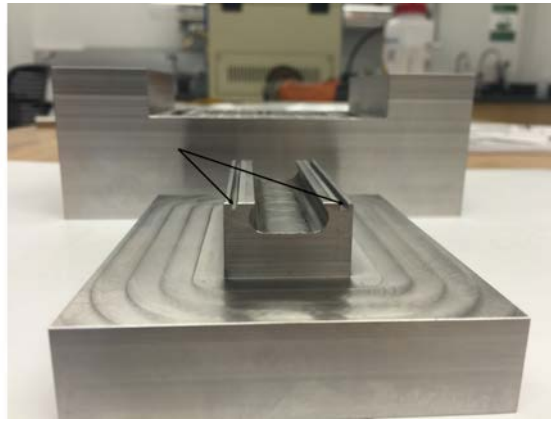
Front view of the test cell lid with arrows pointing out areas for o-rings to be housed to ensure a force holding test coupon to bottom of test cell.
